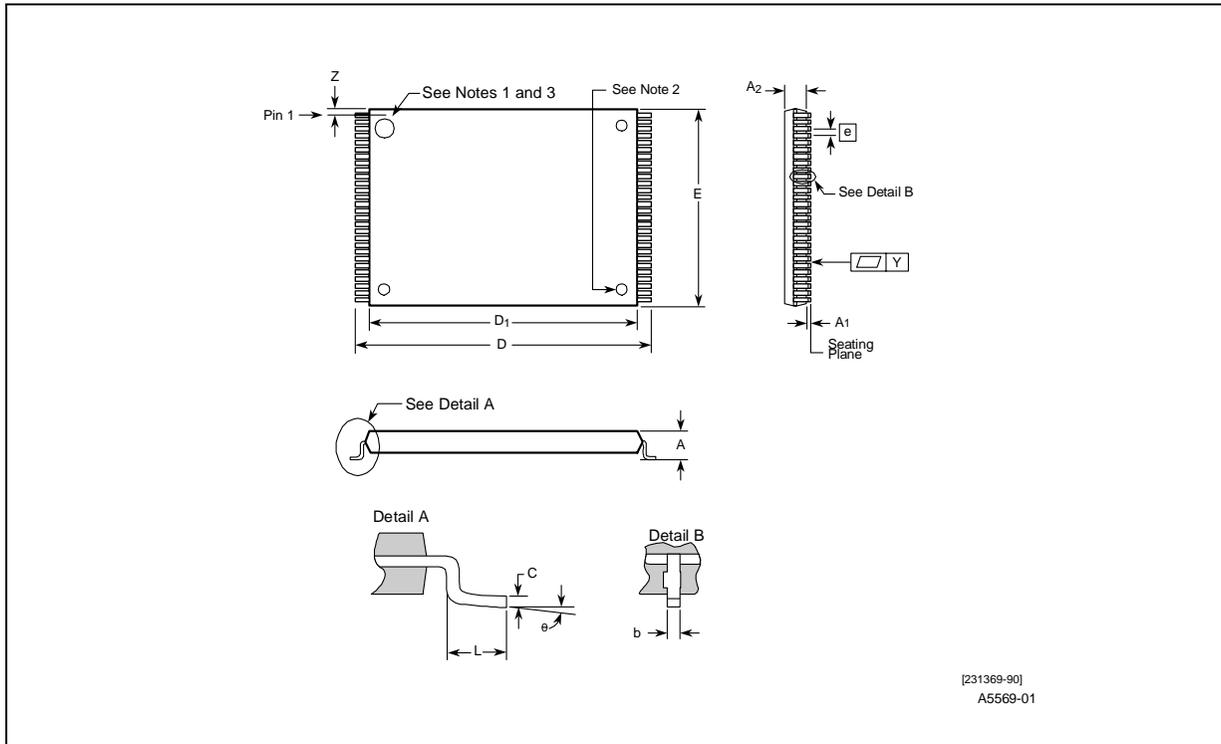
48-Lead TSOP Package Drawing and Specifications
